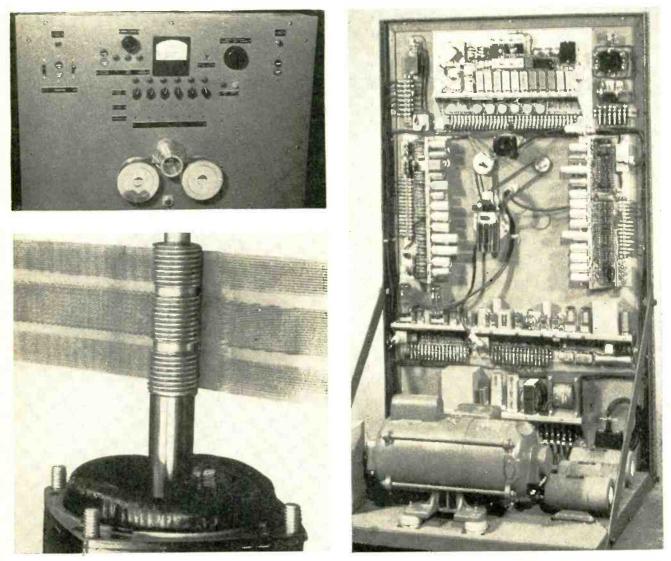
Comb-shaped recording head coupled to cutting tool produces master tape for control (A); screw serves as playback head for producing control signal (B)
